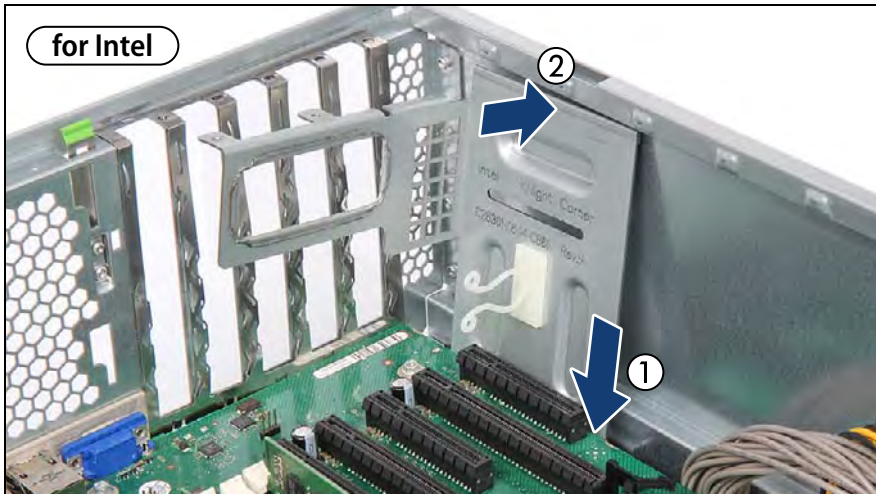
Installing the coprocessor card mounting bracket (Intel) (A)
